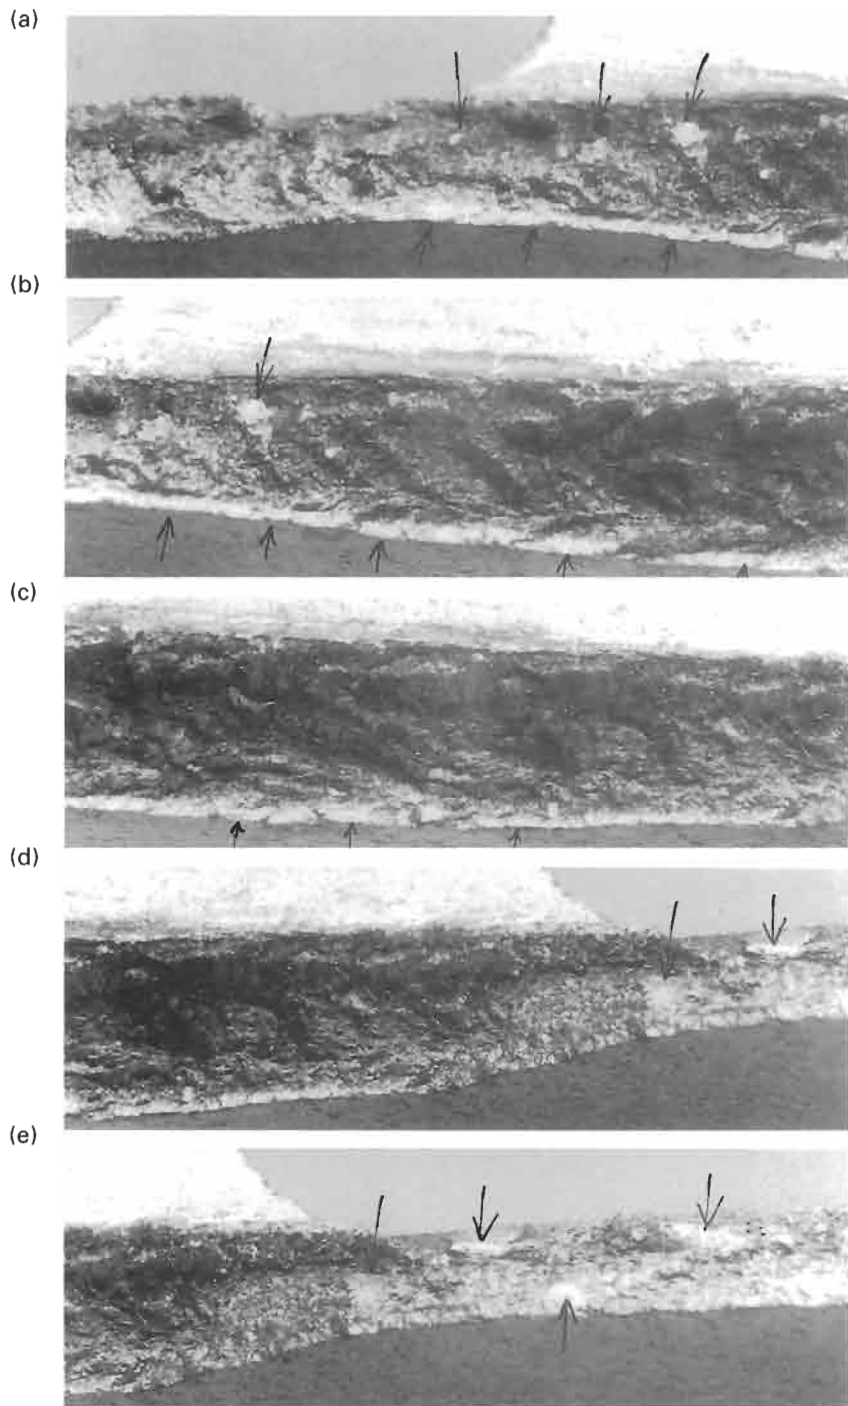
Panoramic sequence of gold-plated fracture surface, left to right across crack from top to bottom. Remnants of cold slugs and lower weld line shown by open arrows.
